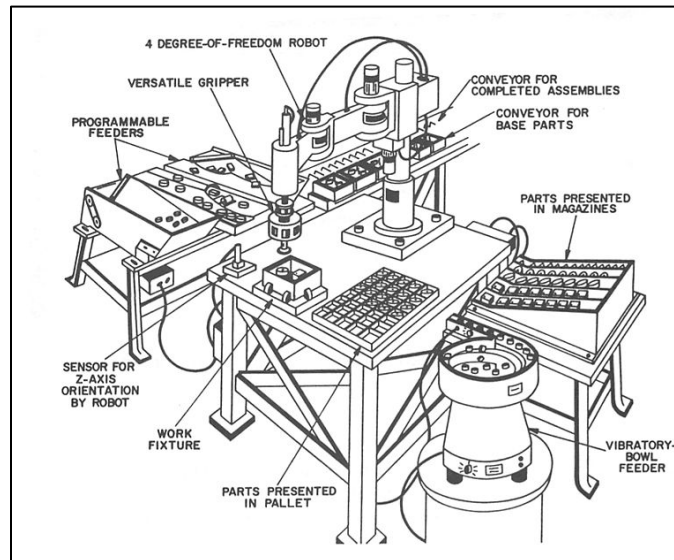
Example of robotic assembly cell (from Rampersad, 1994).
